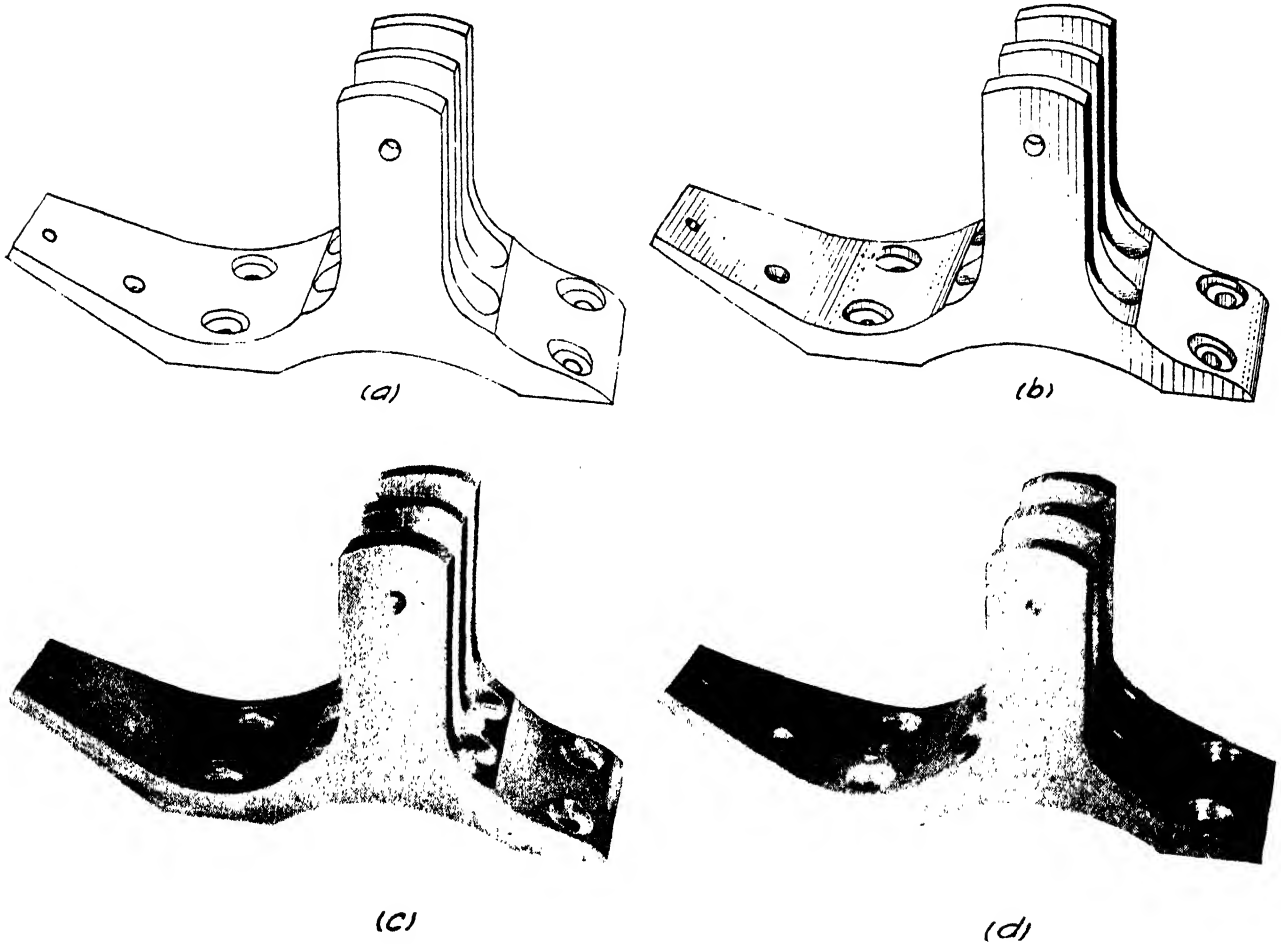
Comparison of line drawing, rendered drawing, and photograph.
